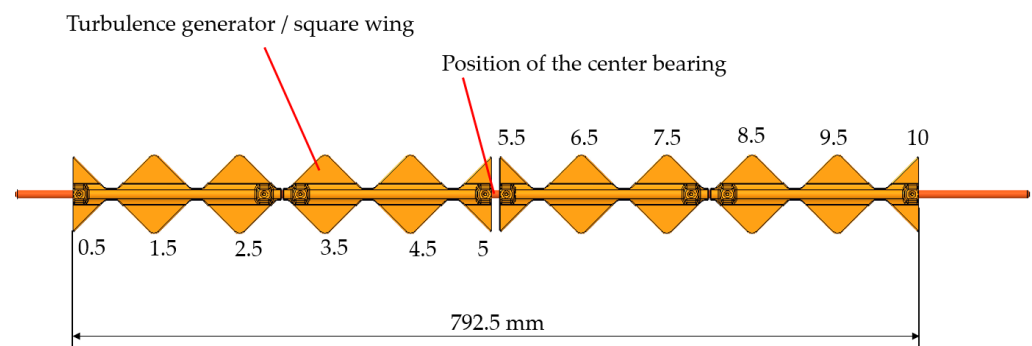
Detail of a single drive shaft with turbulence generators attached.
